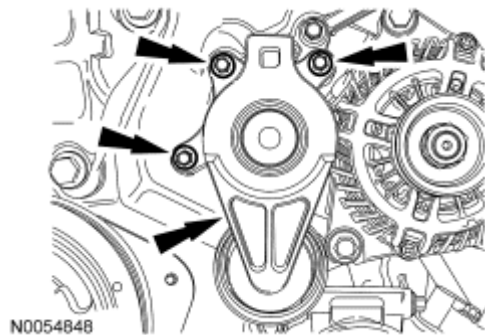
Locating Accessory Drive Belt Tensioner Bolts
